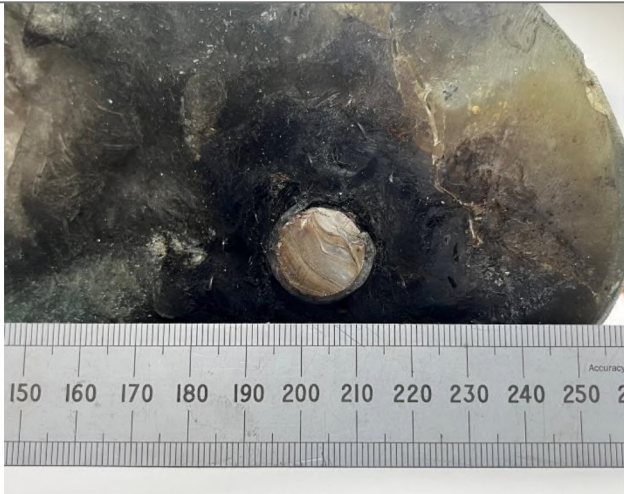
Fracture face of threaded bar and surrounding discolouration
